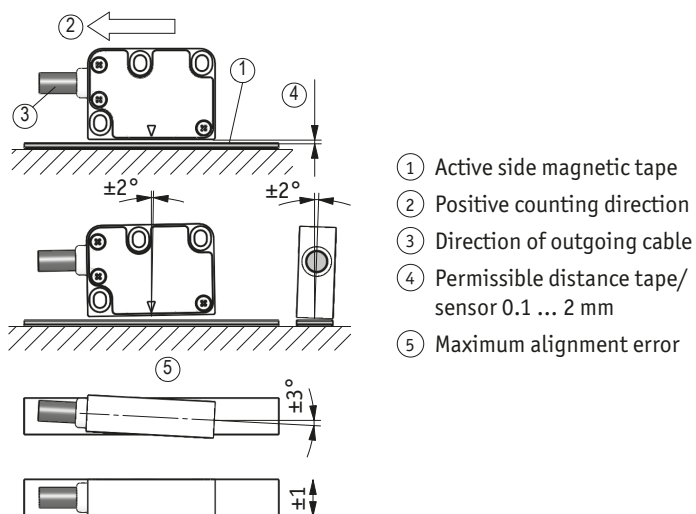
Mounting sensor / magnetic tape, gap measure, tolerances
